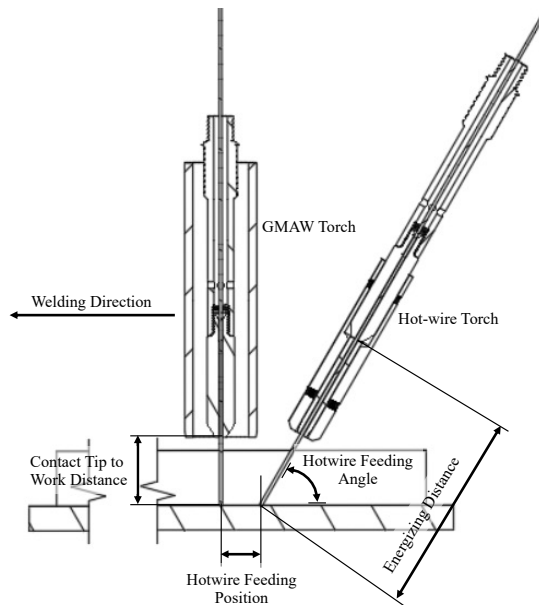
Schematic illustration of hot-wire gas metal arc welding
